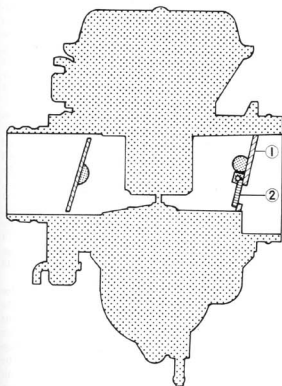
shows the starter system, which includes the choke lever, choke valve ①, relief valve ②, idling cam, and idling link.
